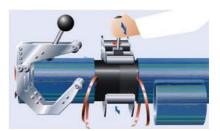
Removal of the oxide layer using a suitable scraping tool
